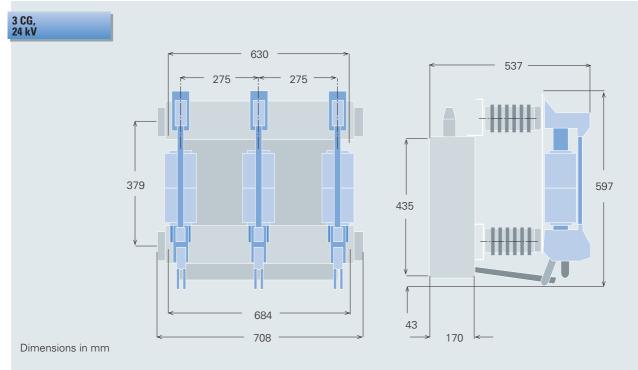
Dimensions of vacuum switch type 3CG (Examples)
